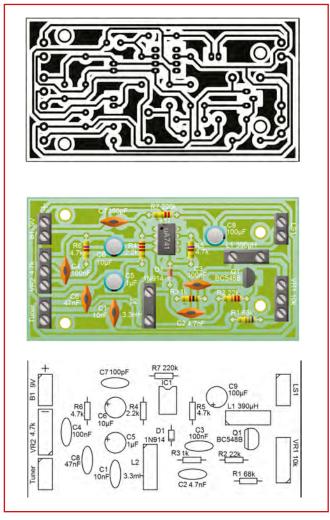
PCB design example (from top to bottom); PCB artwork; PCB real-world view; PCB silk screen
